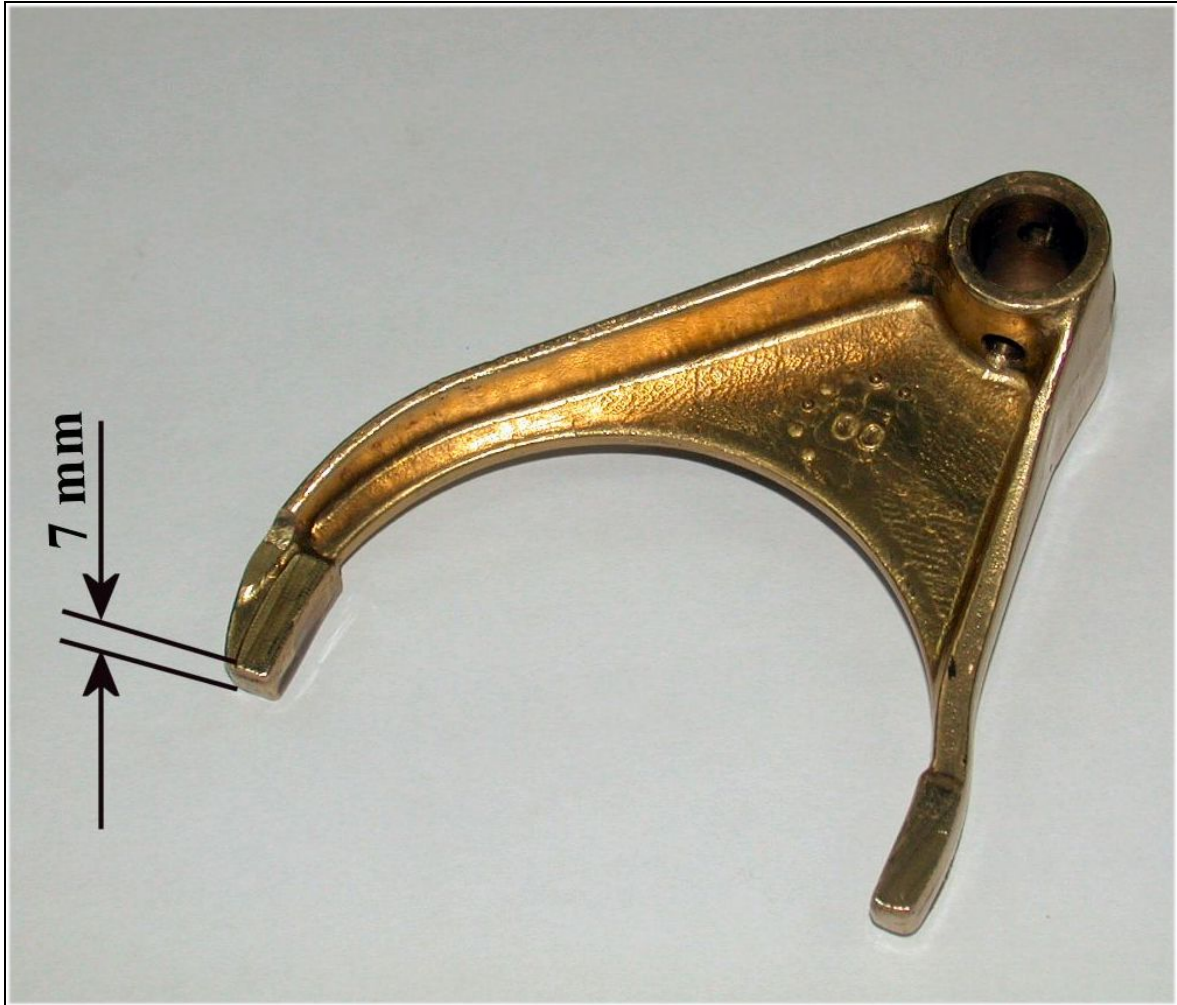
The 3rd – 4th gearshift fork after the face milling required.
